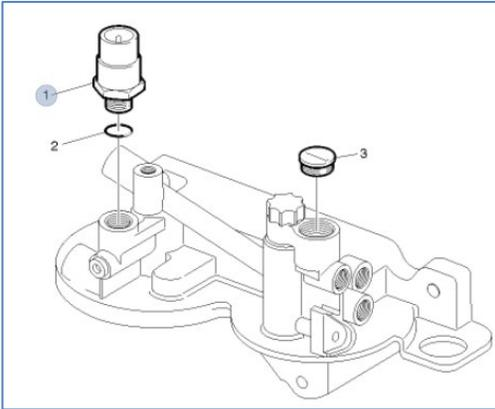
FUEL FILTER HOUSING - VOLVO D13 US10 to US14
